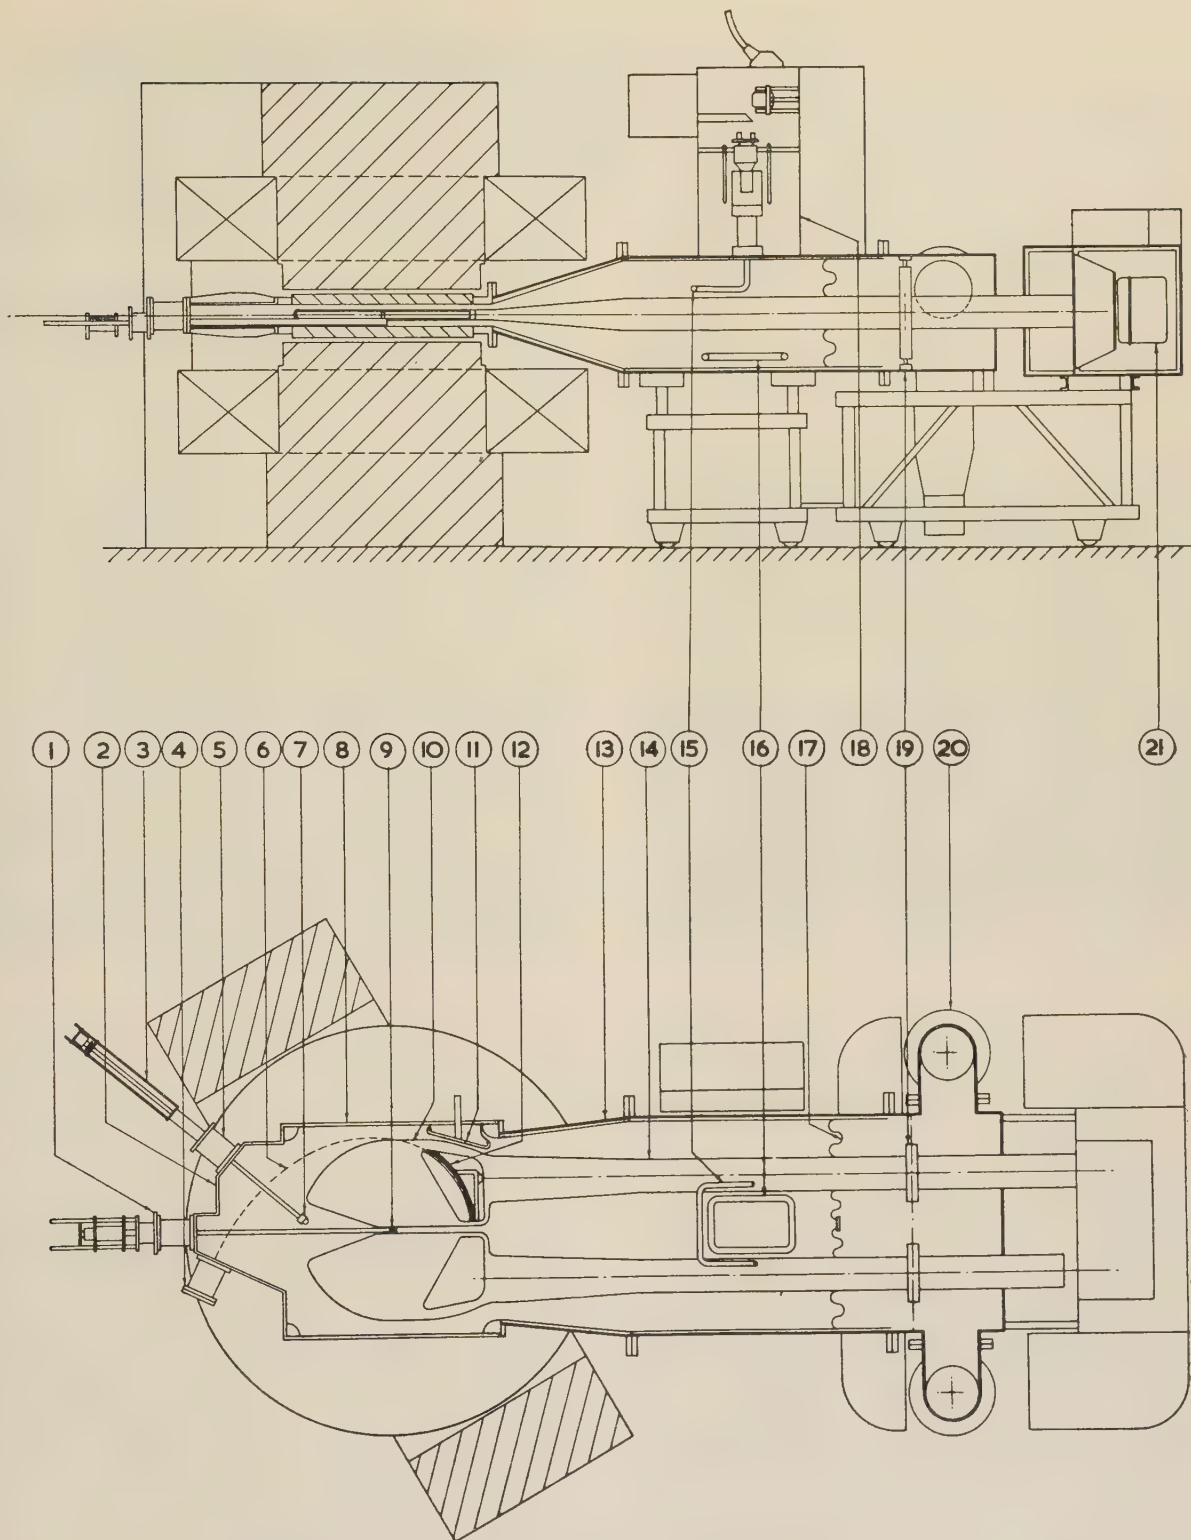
Part section plan and elevation of cyclotron assembly.
